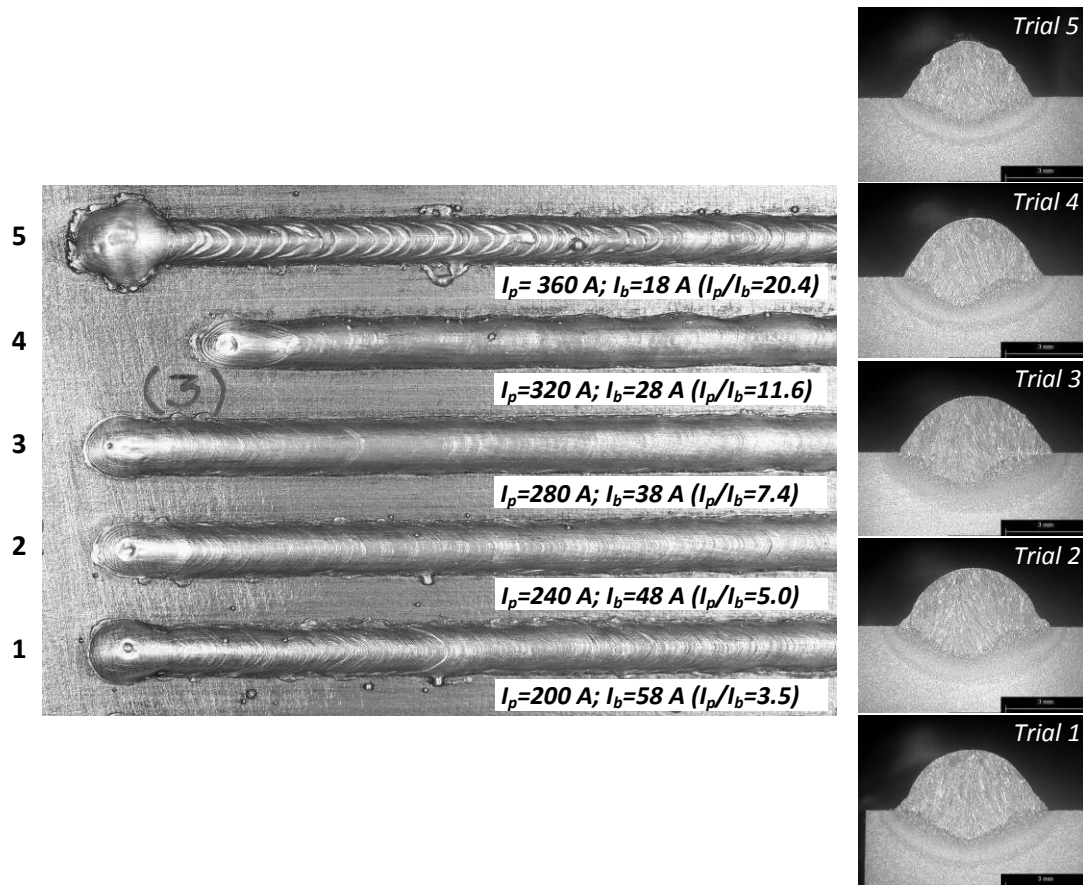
Weld bead top surfaces, transverse cross sections, and control parameters applied in study S_3 .
